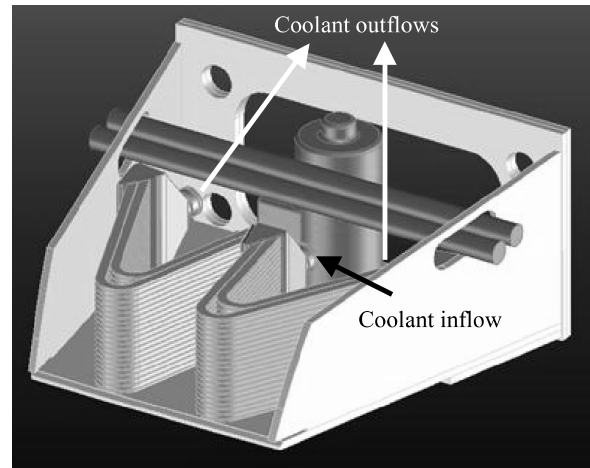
CAD design of the foam based cooler, mounted in the air duct.
